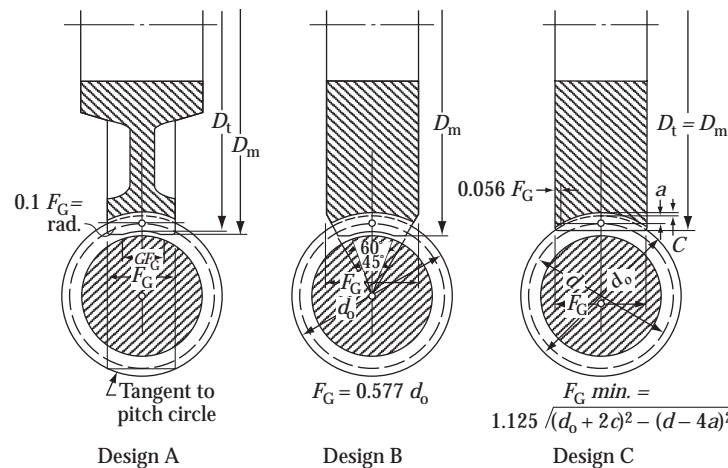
Worm gear design examples. (Dimensions shown have English system symbols.)
